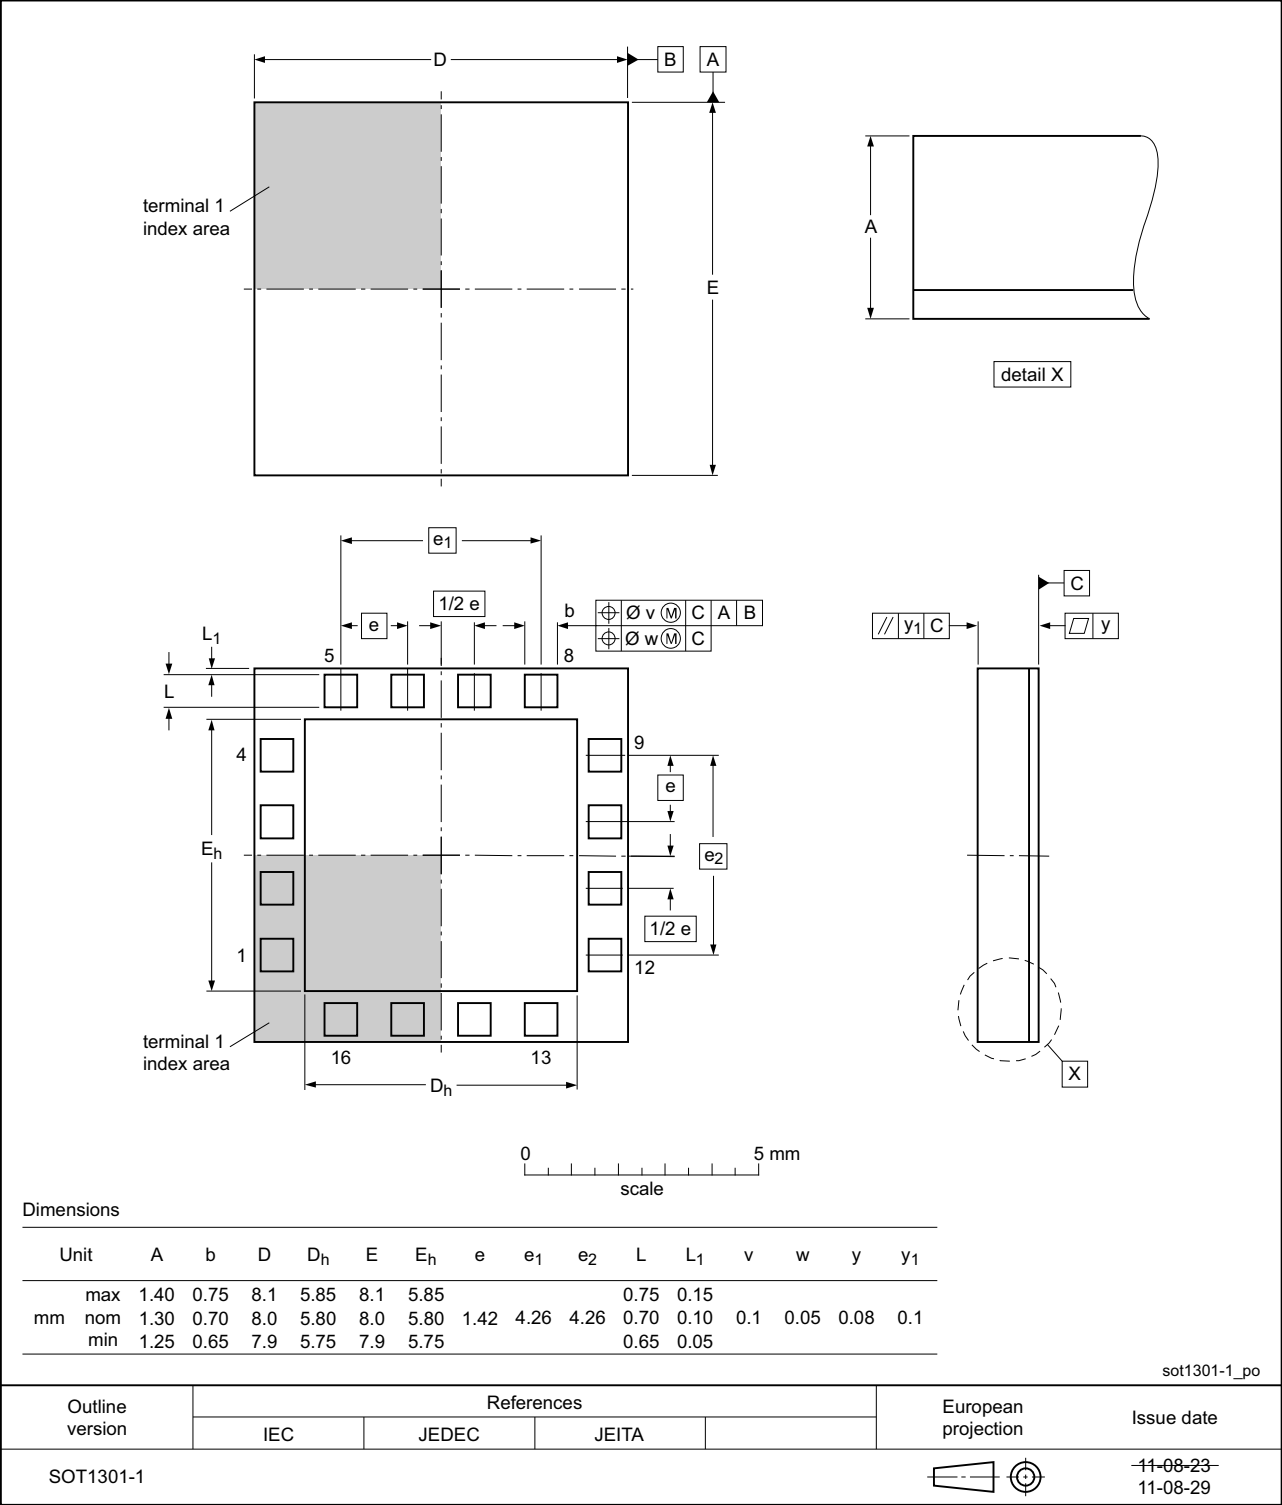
Package outline SOT1301-1 (HLQFN16R)
